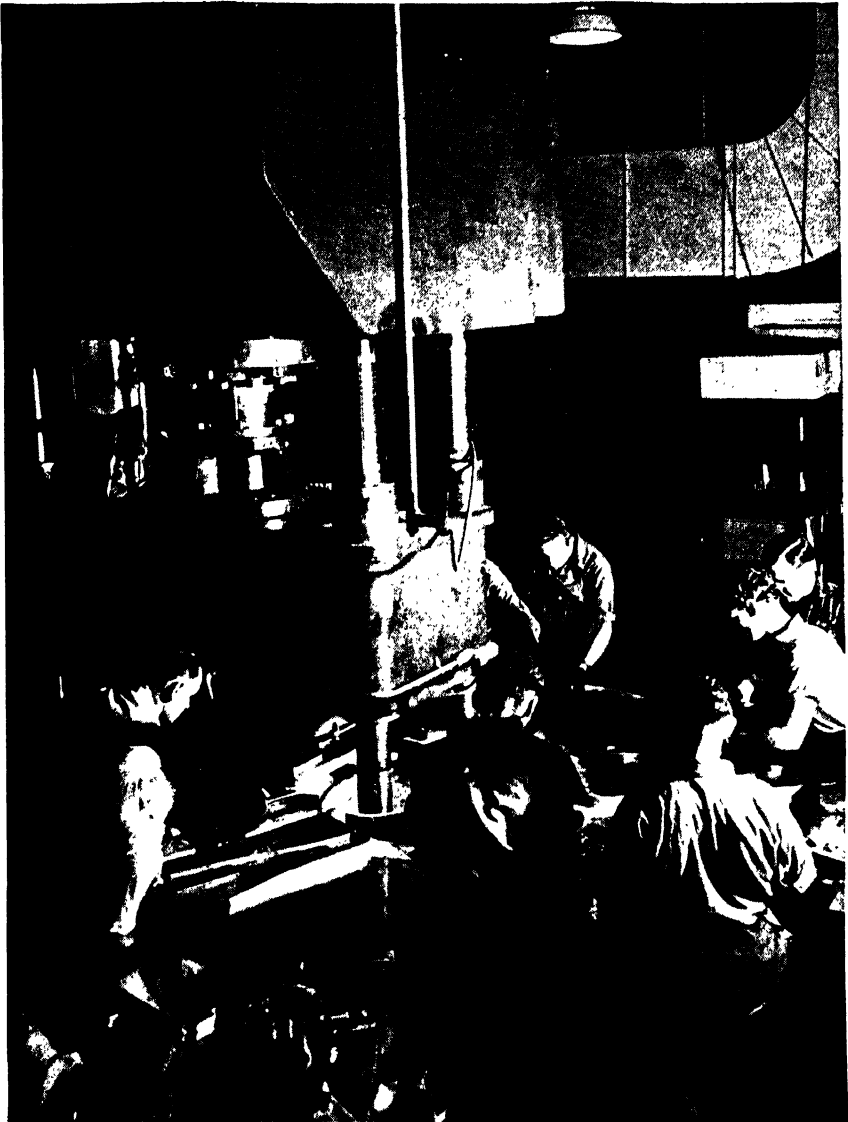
Heavy-duty power-driven straightening machine with coil cradle built in as an integral part of the machine.
